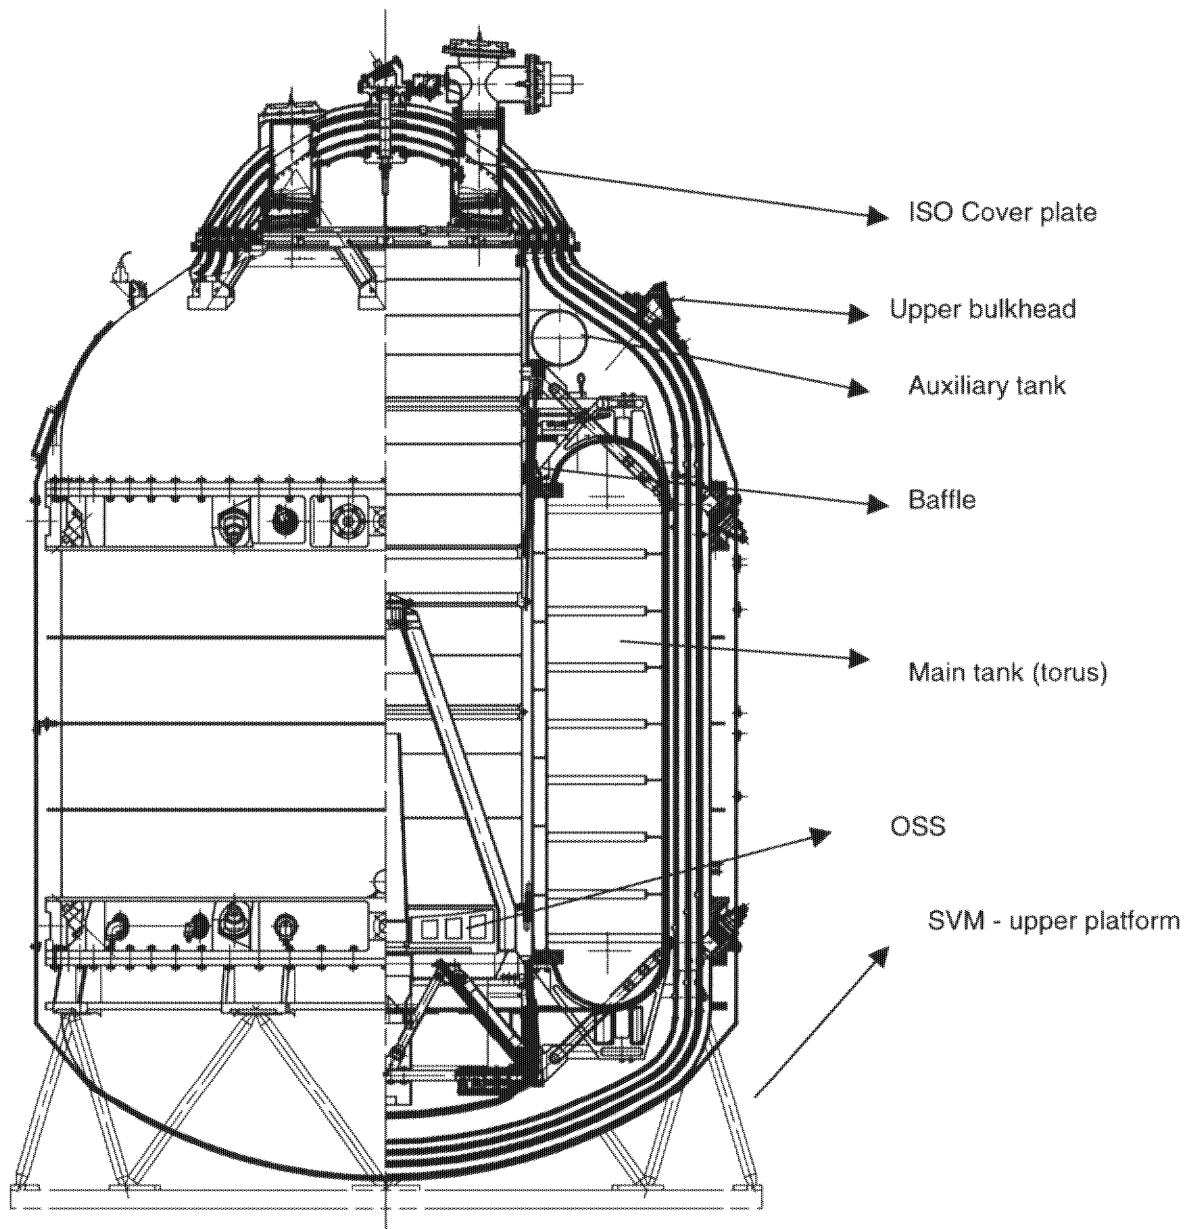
ISO PLM/QM – Parts to be disassembled
